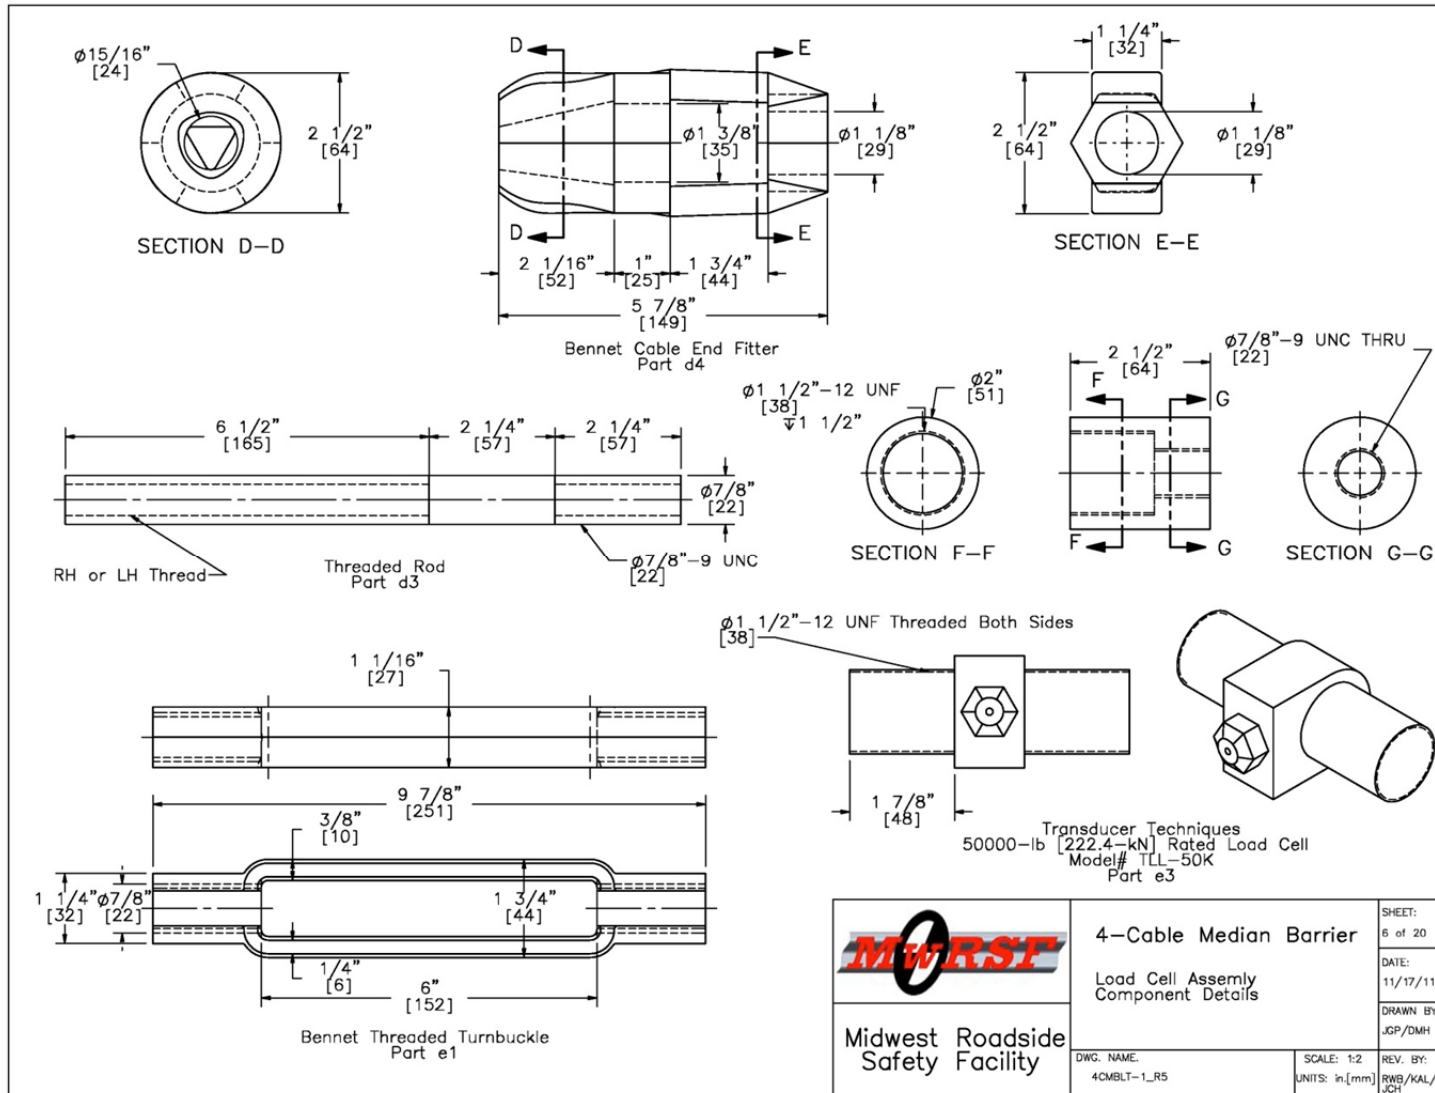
Load Cell Assembly Details, Test No. 4CMBLT-1
